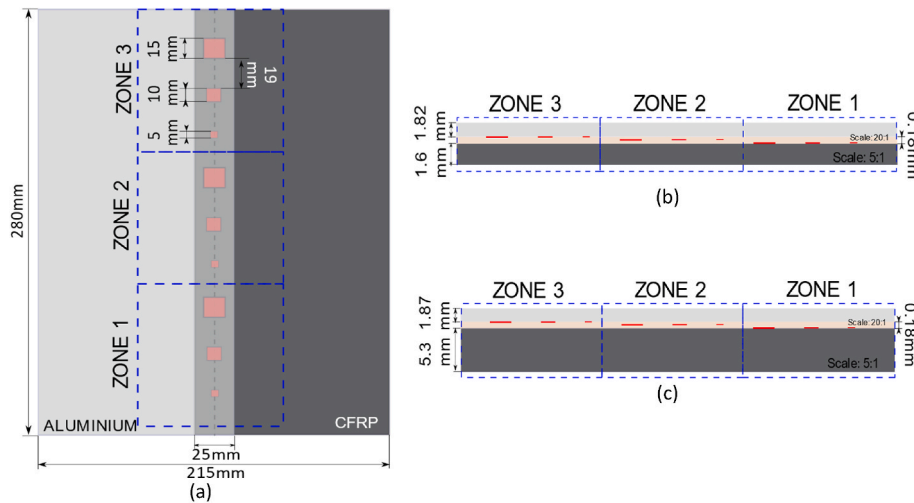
Schematics of adhesively bonded aluminium to CFRP joints: (a) top view of both samples; (b) front view of sample No 1; (c) front view of sample No 2.
